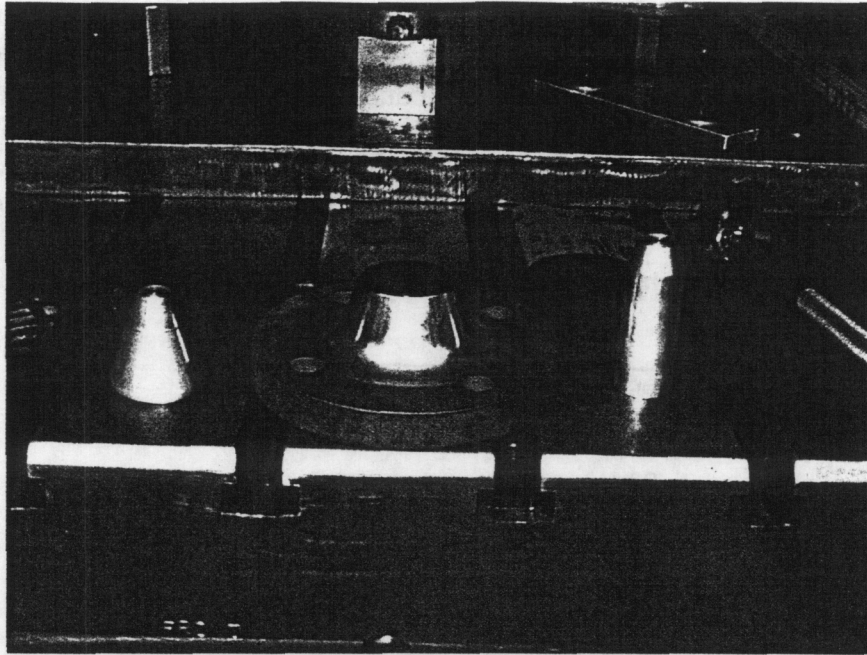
The flat-top upper die is used to forge the starting cylinder with chamfer into a solid cone.
